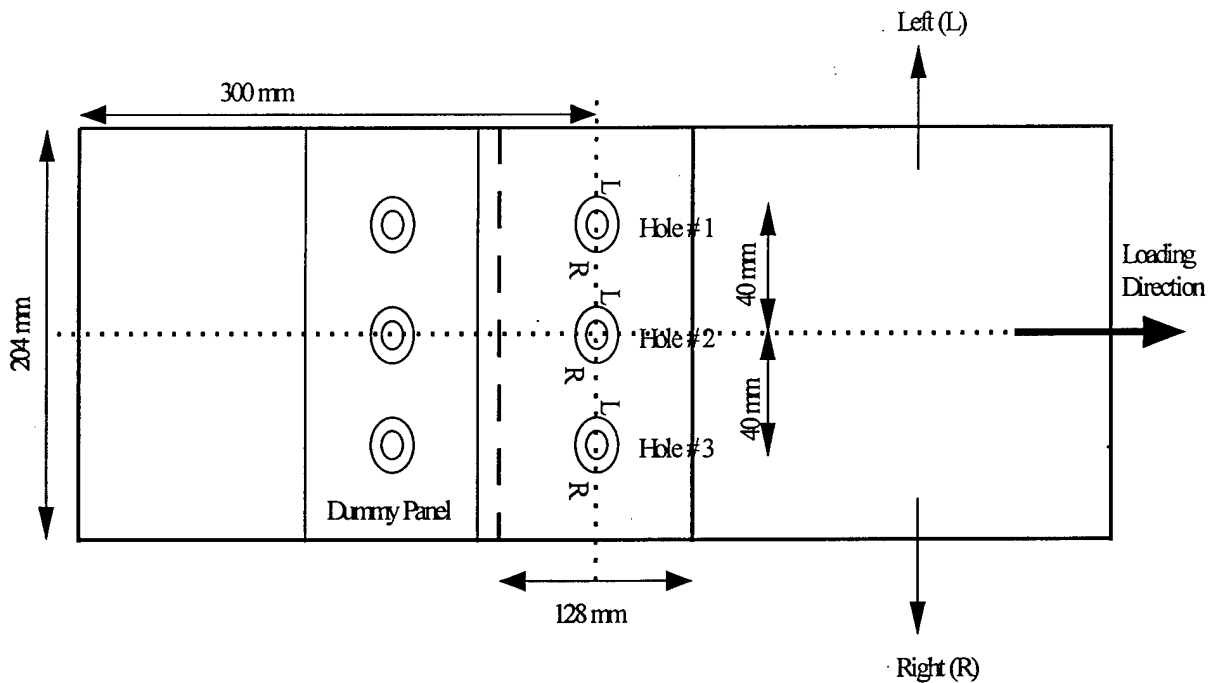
Schematic showing dimensions of the aluminum lap joint.
